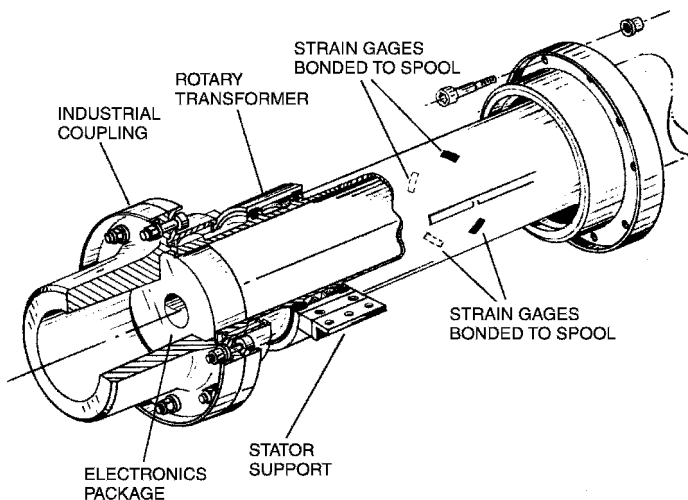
Indikon torque meter components. (*Indikon/Metravib Instruments, Inc., Cambridge, Mass.*)
